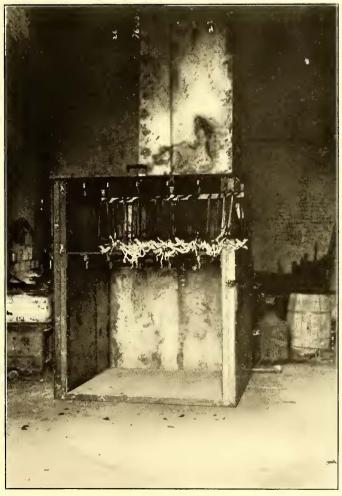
BAKING OVEN, WITH RACK OF COILS PULLED OUT
